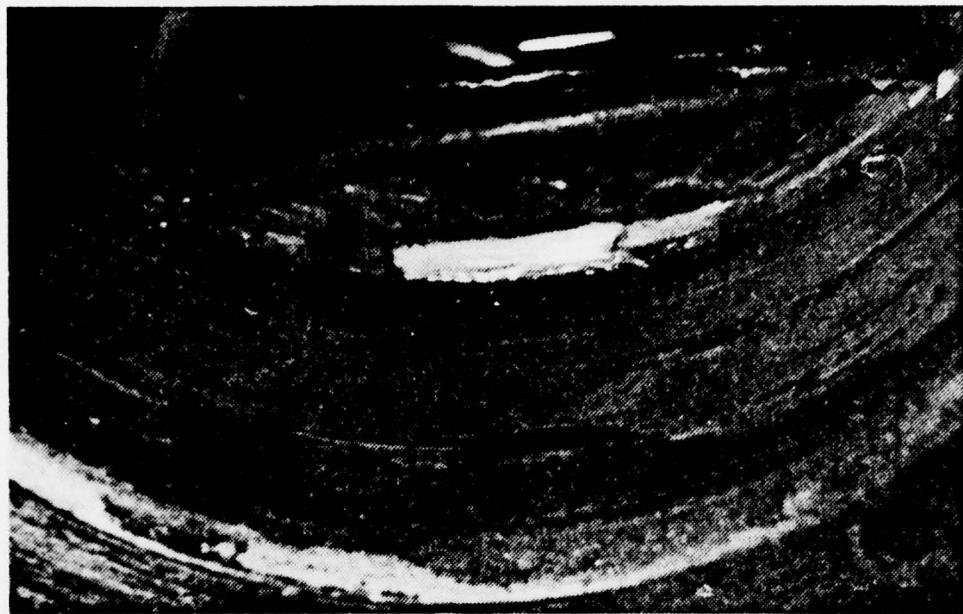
Corrosion of O-ring Gland, C Preamplifier Housing
